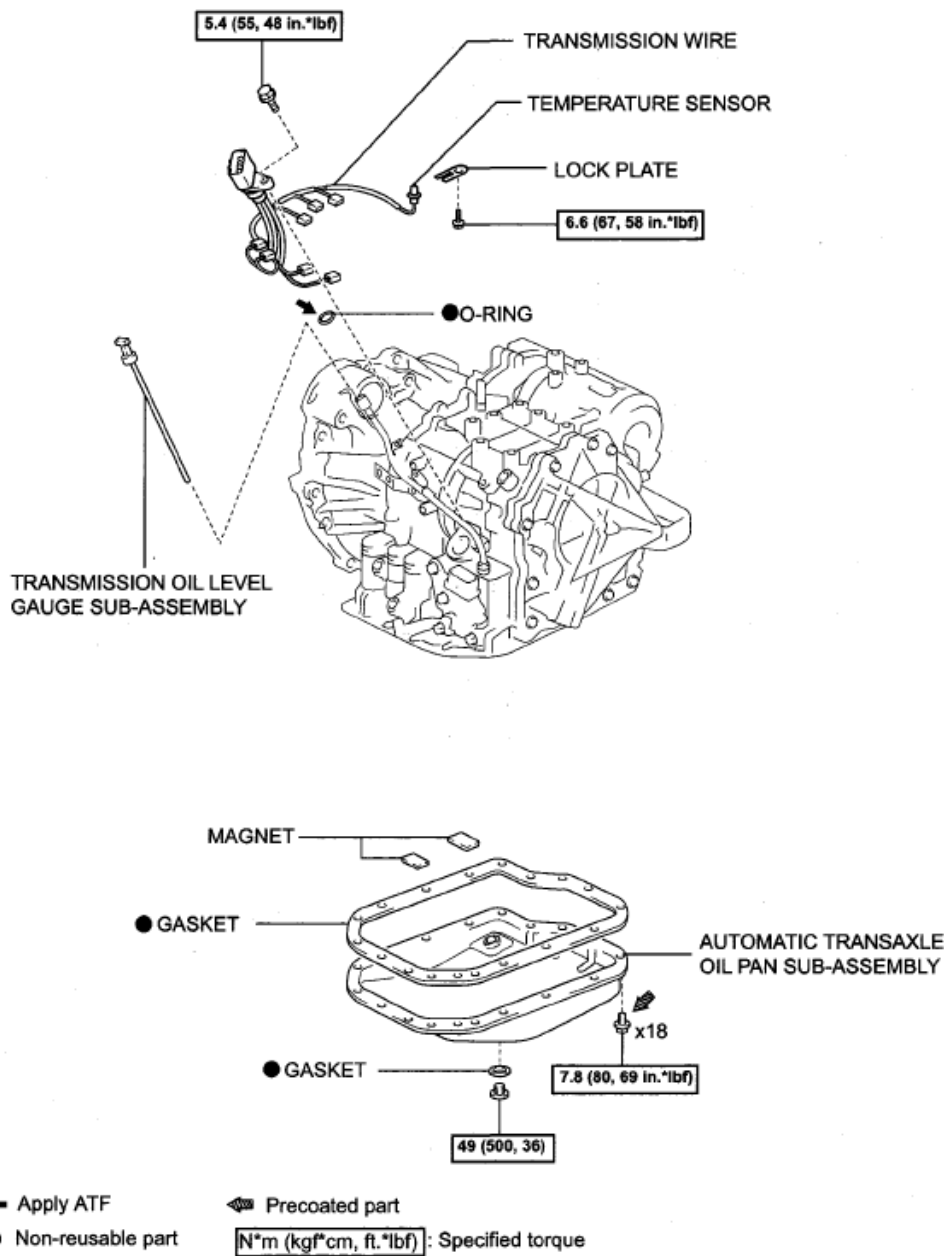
Identifying Transmission Wire Components With Torque Specifications
